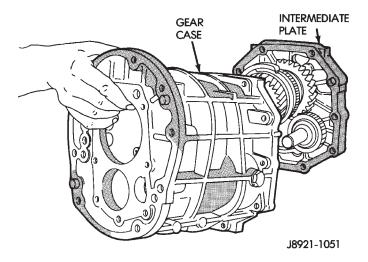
Install Transmission Gear Case to the Intermediate Plate
